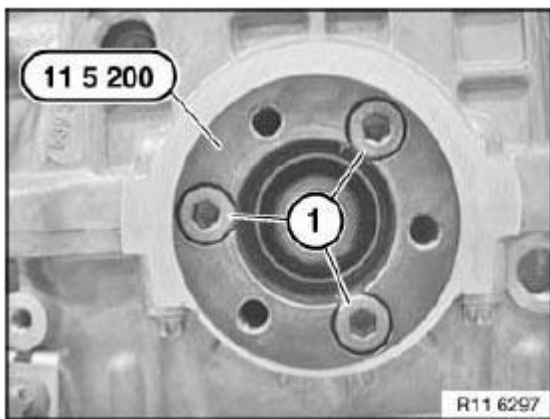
Identifying Screws With Special Tool (11 5 200)
